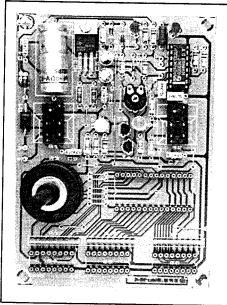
As shown on these photographs of the assembled PCB, IC sockets are perfect for mounting the push-buttons and the DIP switch blocks. SIL strips are used for the ZIF socket. The height of the prototype enclosure did not require low-profile IC sockets to be stacked.
